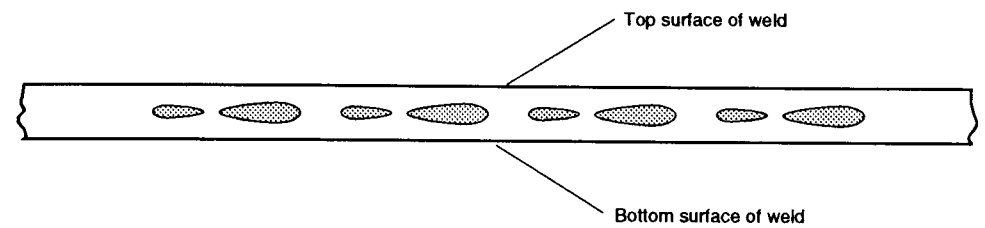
Schematic showing lengthwise sectional view of the weld centerline of a lap seam joint with irregular nugget shapes. The lack of uniformity in the shape of the nuggets is attributable to an irregular pulse shape that does not provide sufficient time for heat flow to blend together the doublets.
